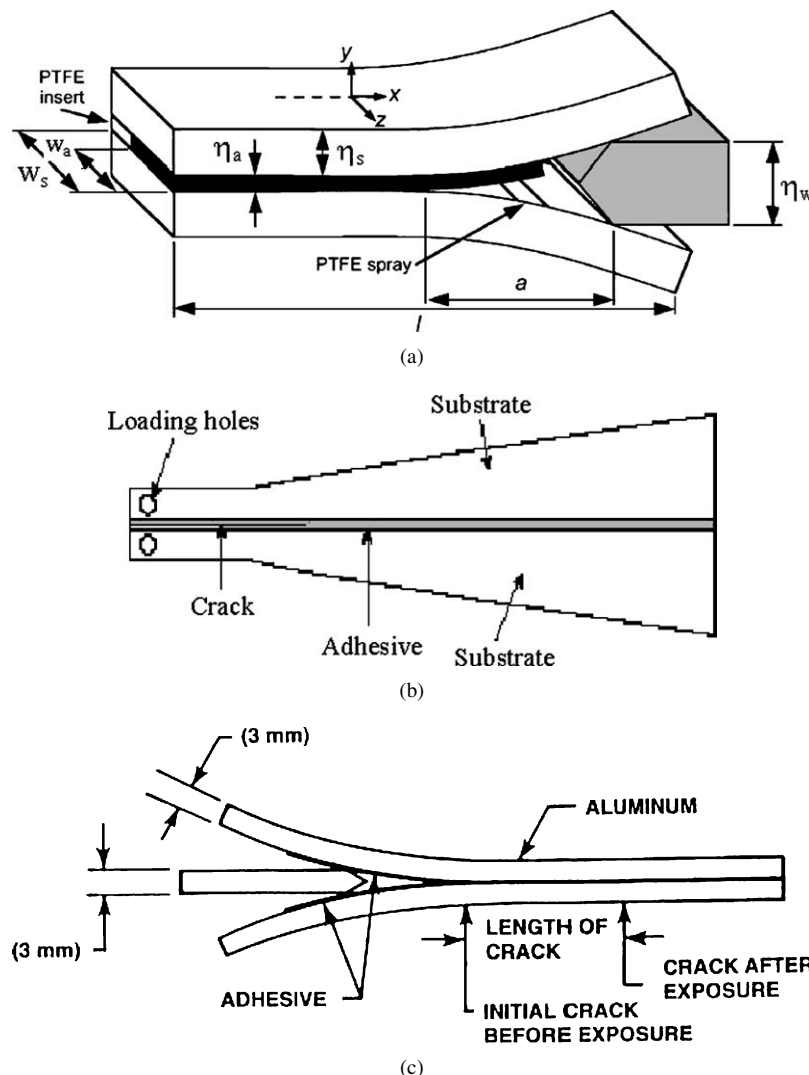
Double-cantilaver beam (DCB) and wedge-crack tests: (a) principle of the wedge-opened double cantilaver beam (DCB) test with definition of the notations [124], (b) Tapered double cantilaver beam (TDCB) test specimen [134], and (c) Boeing wedge crack durability test for bonded metal structures [10].
